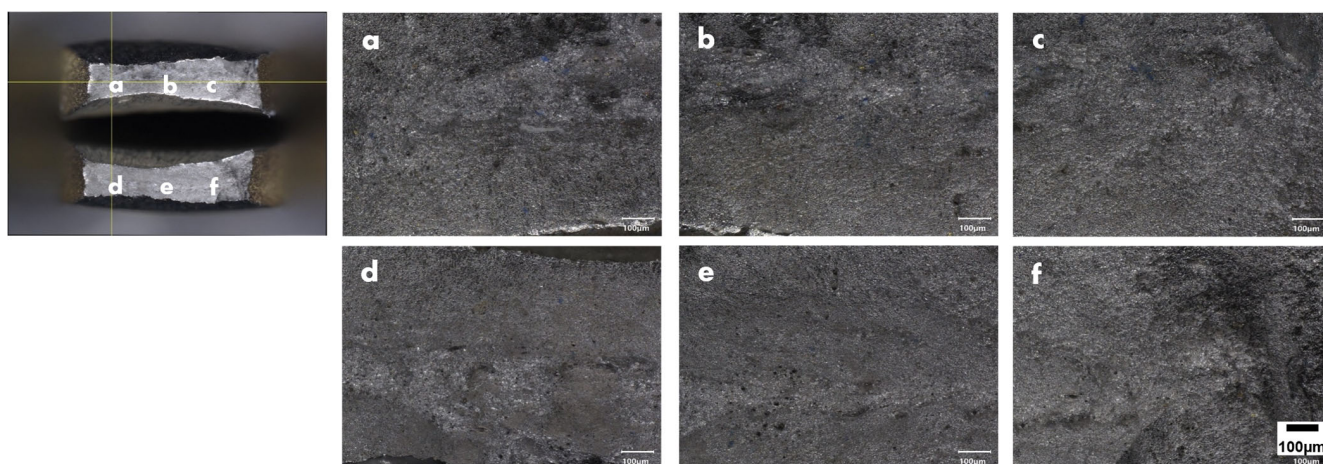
Digital microscope fractographs of Specimen 4: macroscopic overview (left) with observation positions (a–f) on the two mating fracture surfaces. (a–c) One fracture surface; (d–f) the opposite fracture surface. All regions exhibit fibrous fracture morphology with equiaxed dimples and no cleavage features, confirming fully ductile failure. Scale bars: 100 µm (all images).
